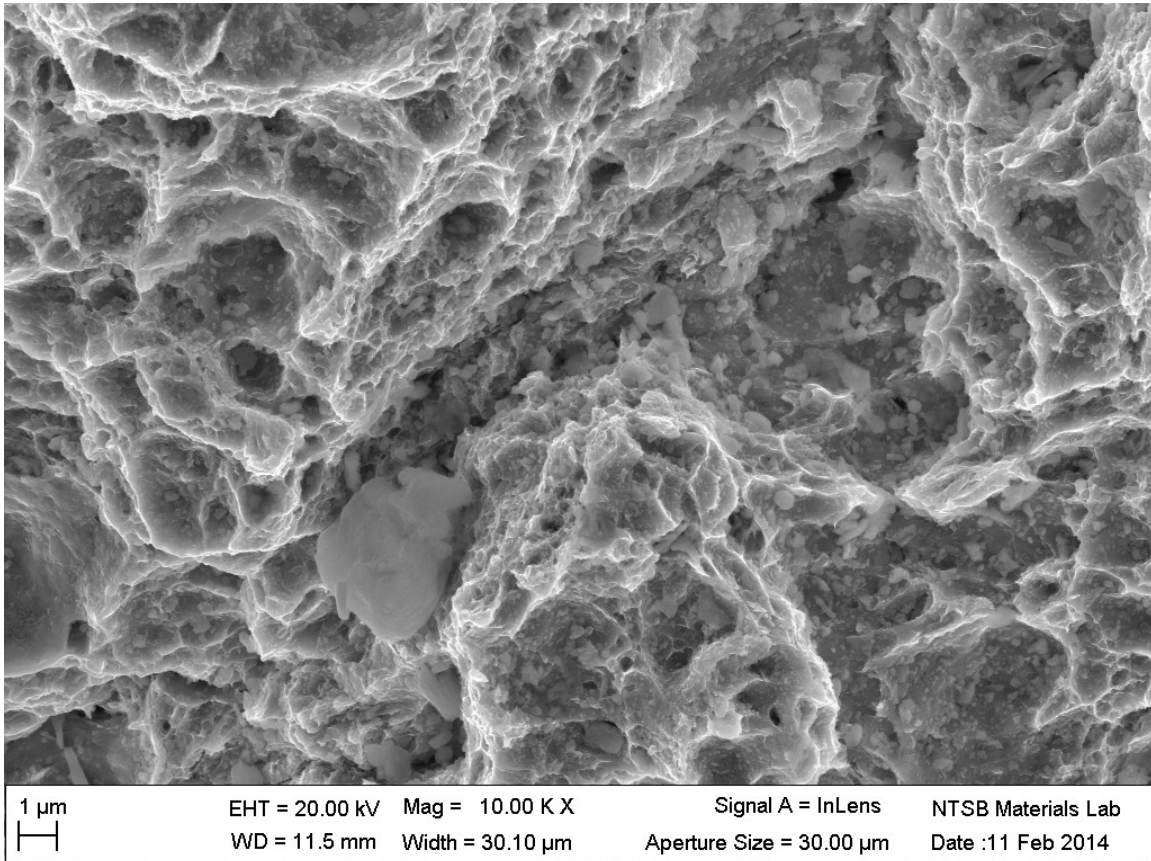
SE micrograph of the bolt fracture surface, showing dimple rupture indicative of overstress.
